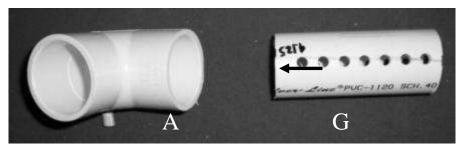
Assembly of the Medium/Large Wheelchair (Step 9).
